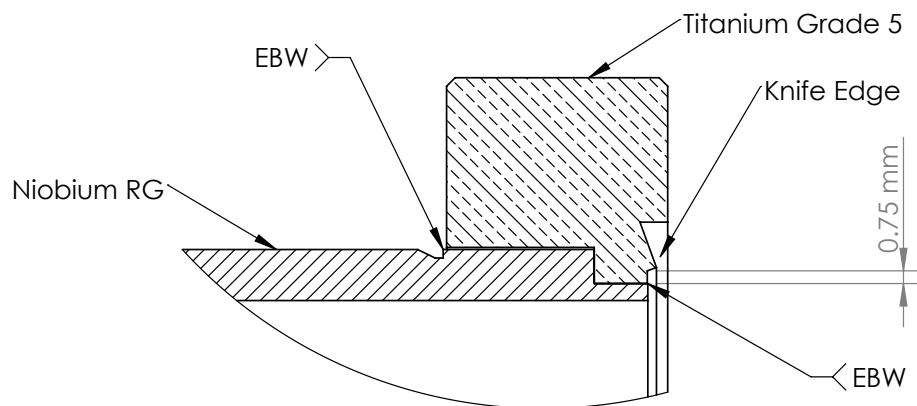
Geometry of the RF port weld showing the proximity of the weld to the knife edge. A low penetration weld is performed near the knife edge and stitch welds on the outer surface at the back of the flange.
